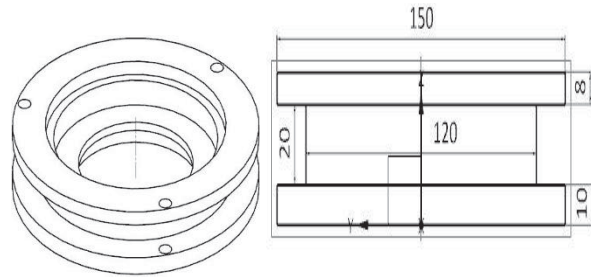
Schematic drawing of aluminium holding arrangement for regenerator for flushing with high pressure hot air
